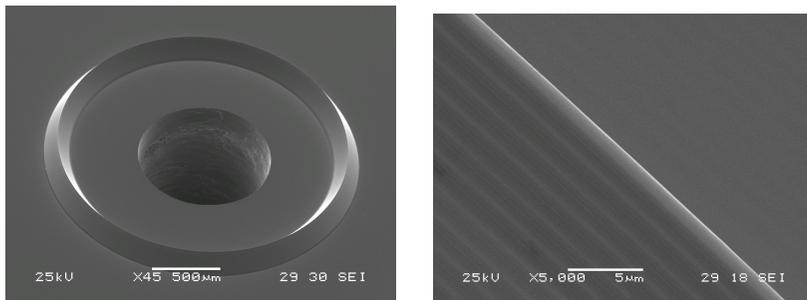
Circular knife machined in nickel layer on valve seat; right: detail of the knife edge showing sub-micron rounding.
